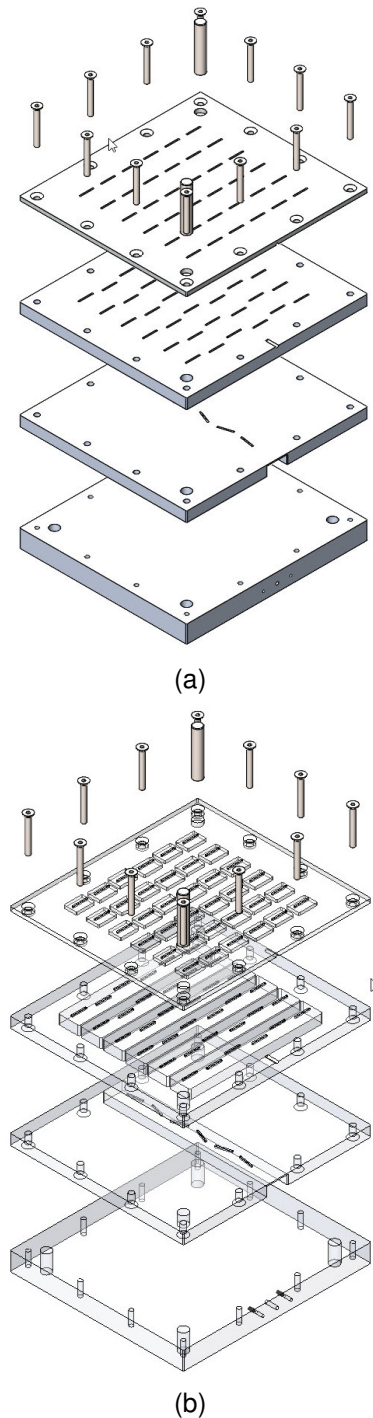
Exploded view of the prototype array with (a) solid surfaces and (b) transparent surfaces.
